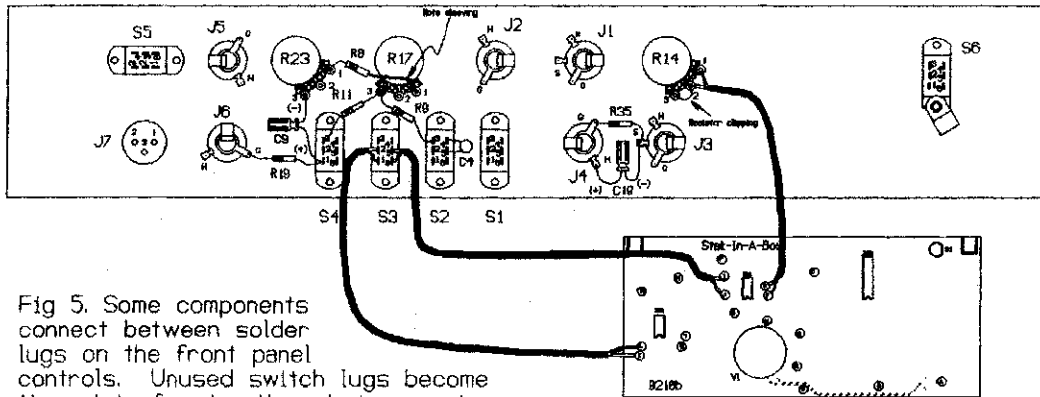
Some components connect between solder lugs on the front panel controls. Unused switch lugs become tie points for junctions between wires and components. Shielded cable is used for noise sensitive wiring.
